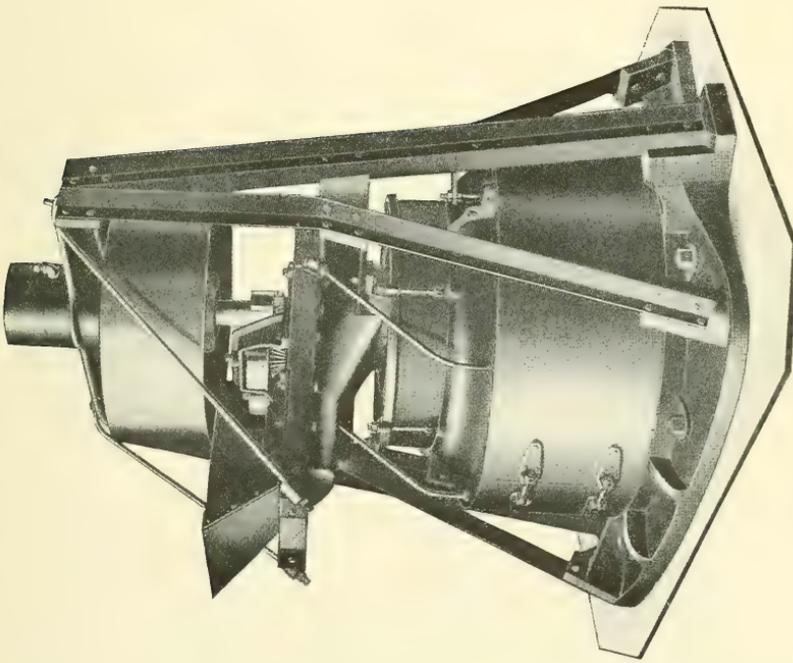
RING ROLL MILL CLOSED—READY FOR OPERATION.
